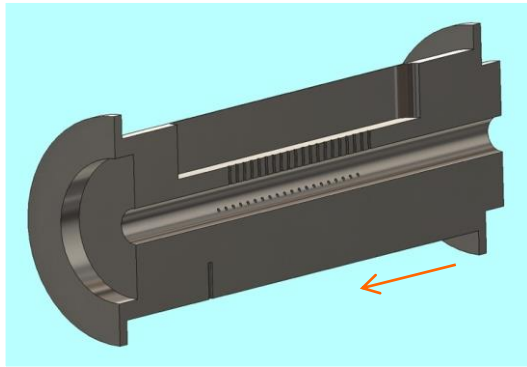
An isometric view of a 180° section through the HD90 test piece using SolidWorks.
